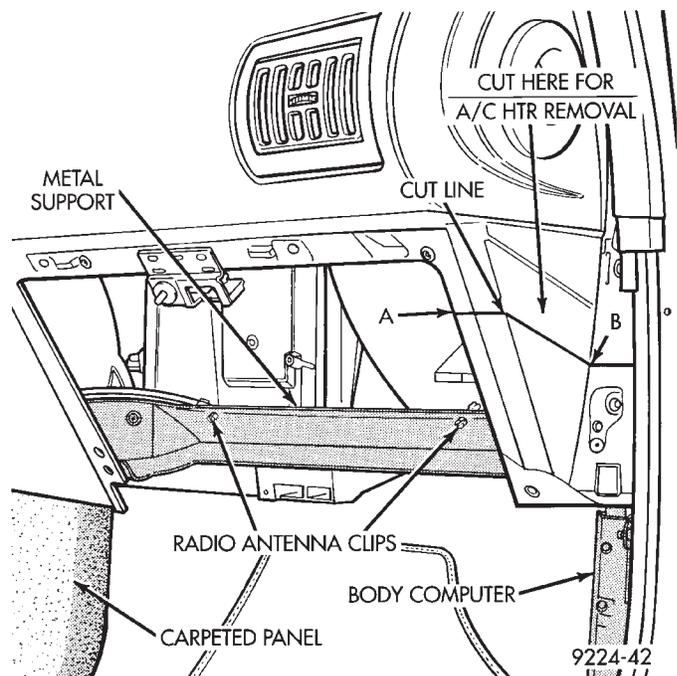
Cut Line For A/C-heater Removal—AG/AJ Body
